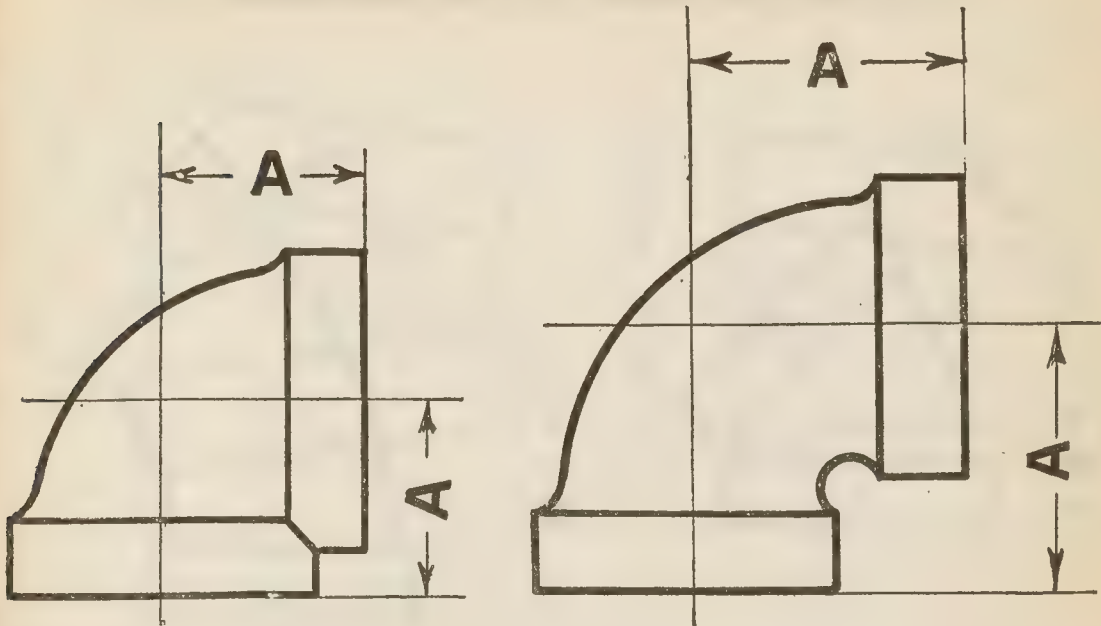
,033.—Dimensions of Essex 90° elbow, *short turn*.
